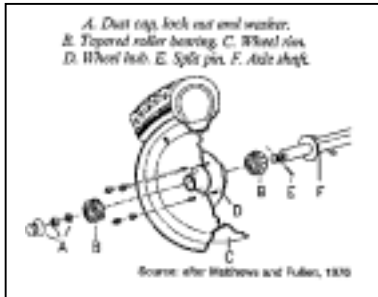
Wheel and axle unit with roller bearing and pneumatic tyres, as widely used in West Africa.
